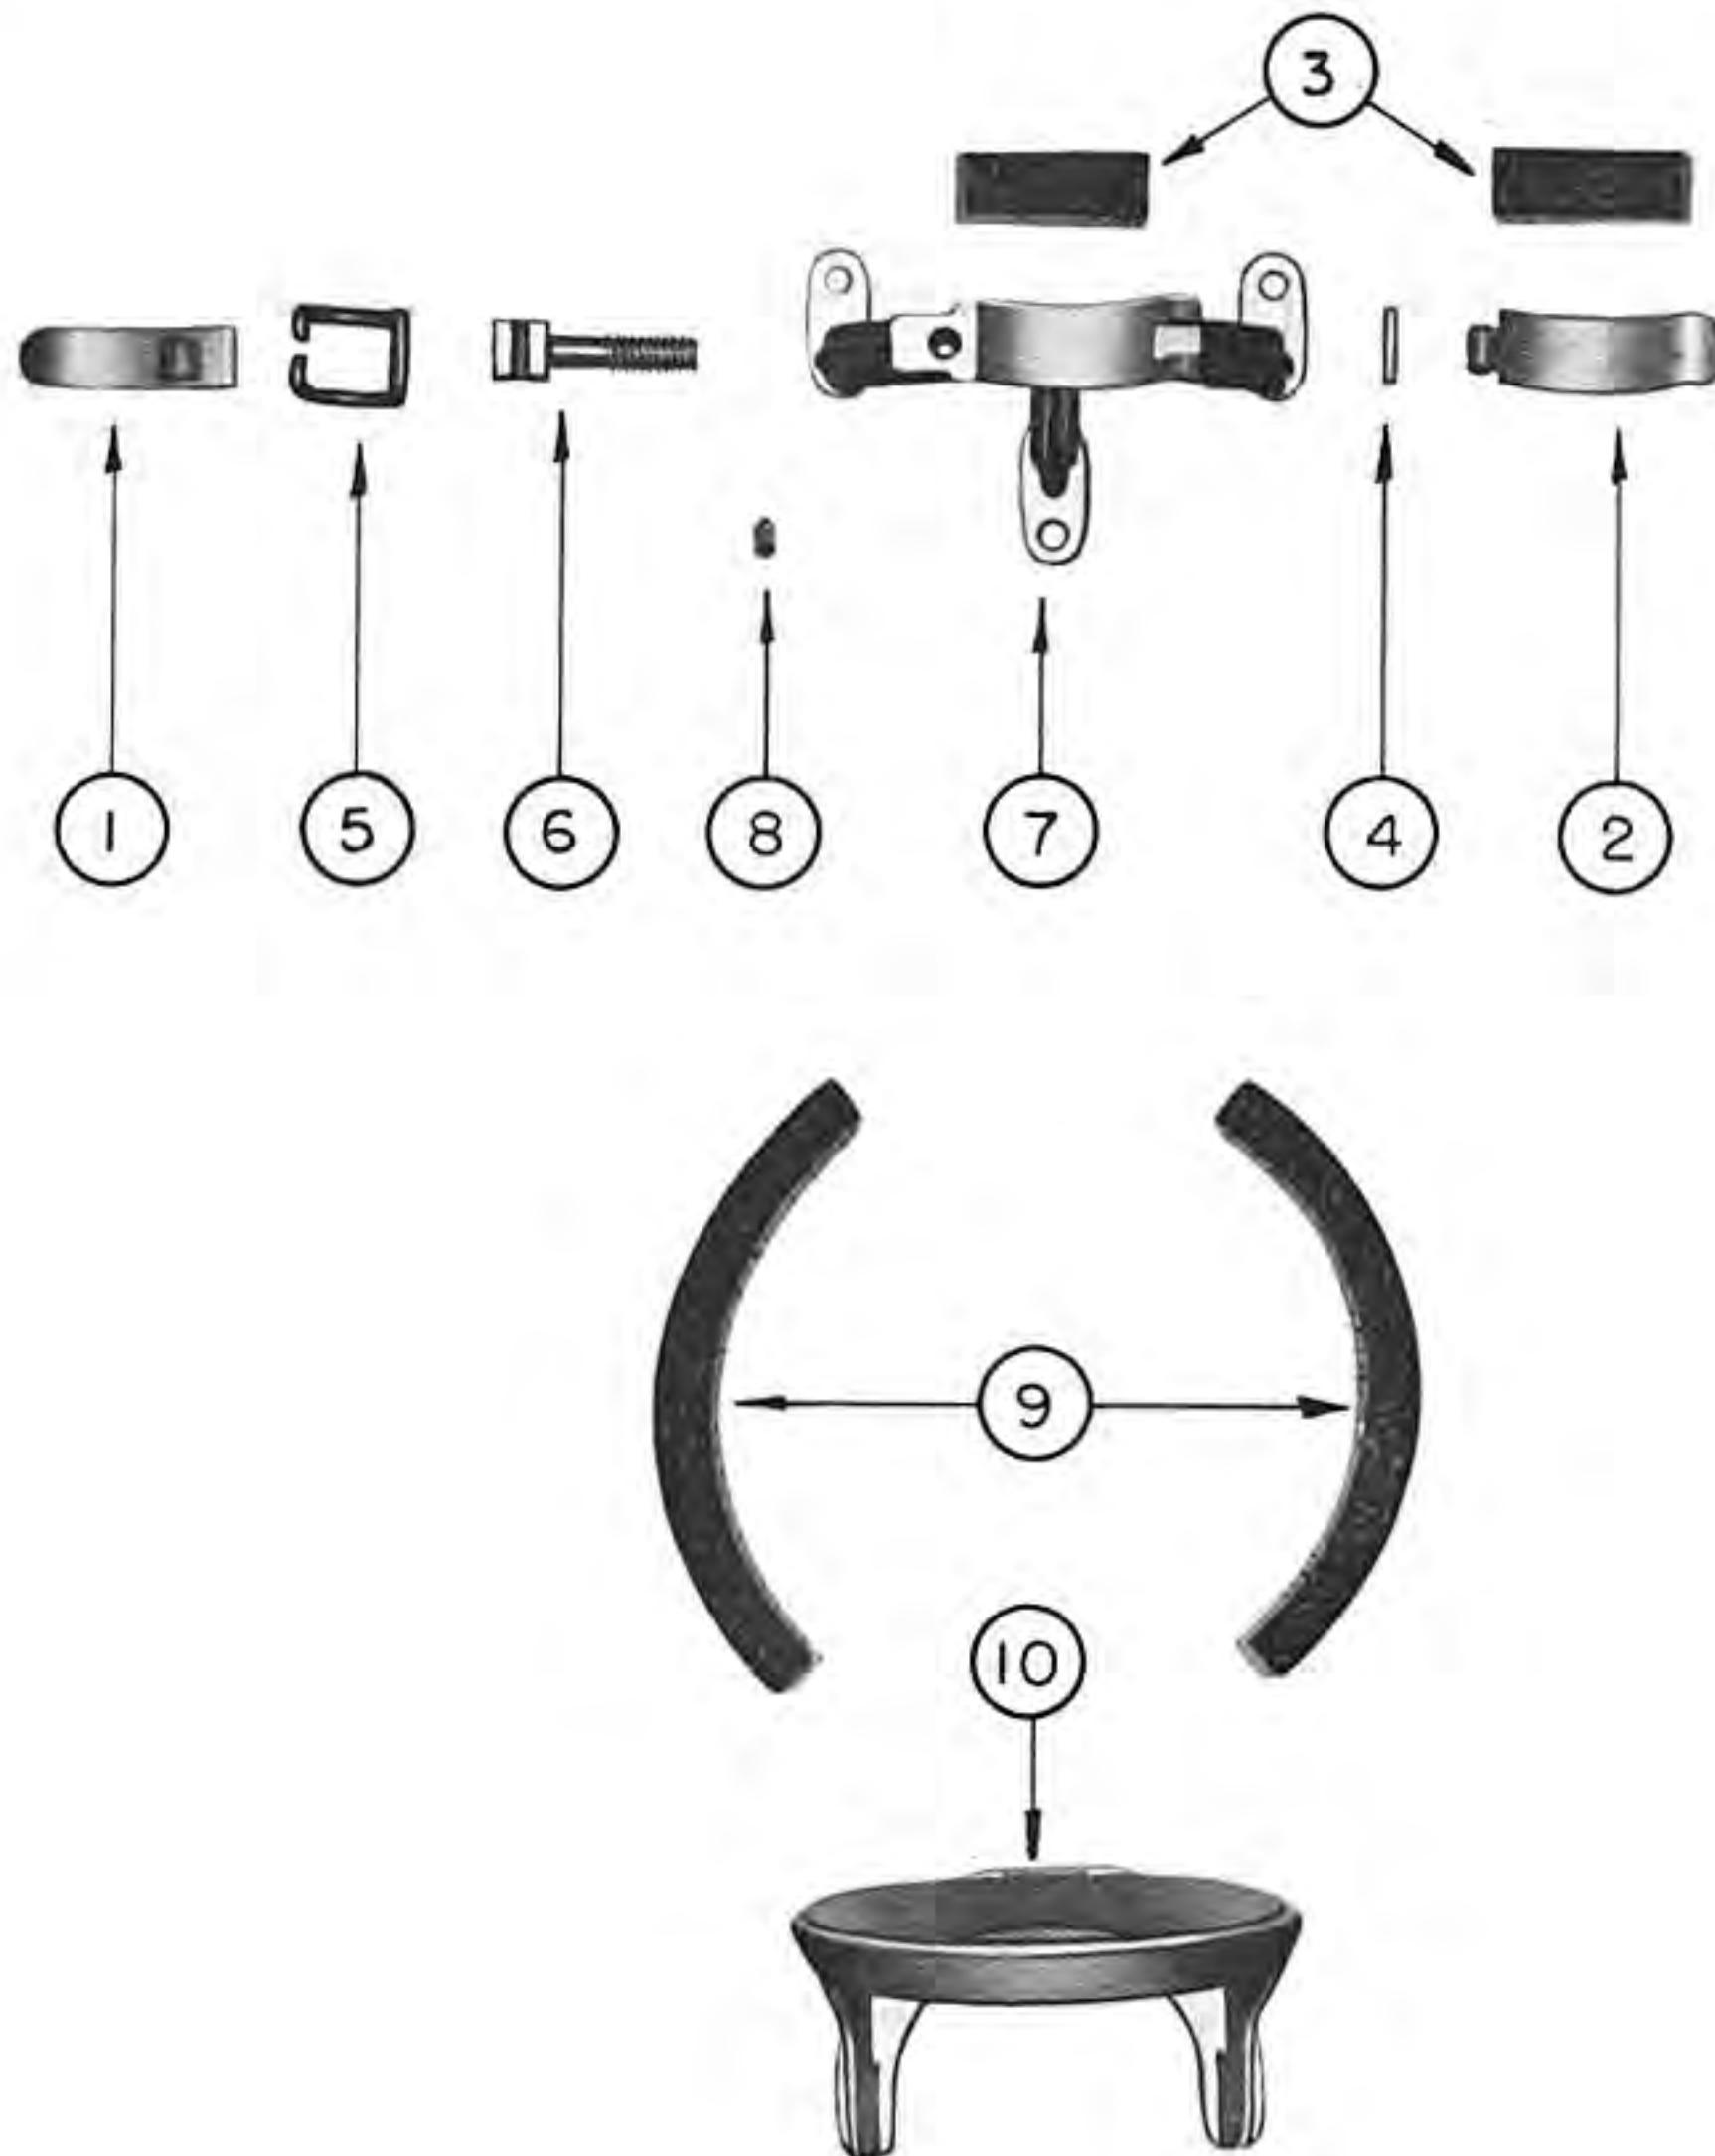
Exploded View - Upper and Lower Bracket Assembly
